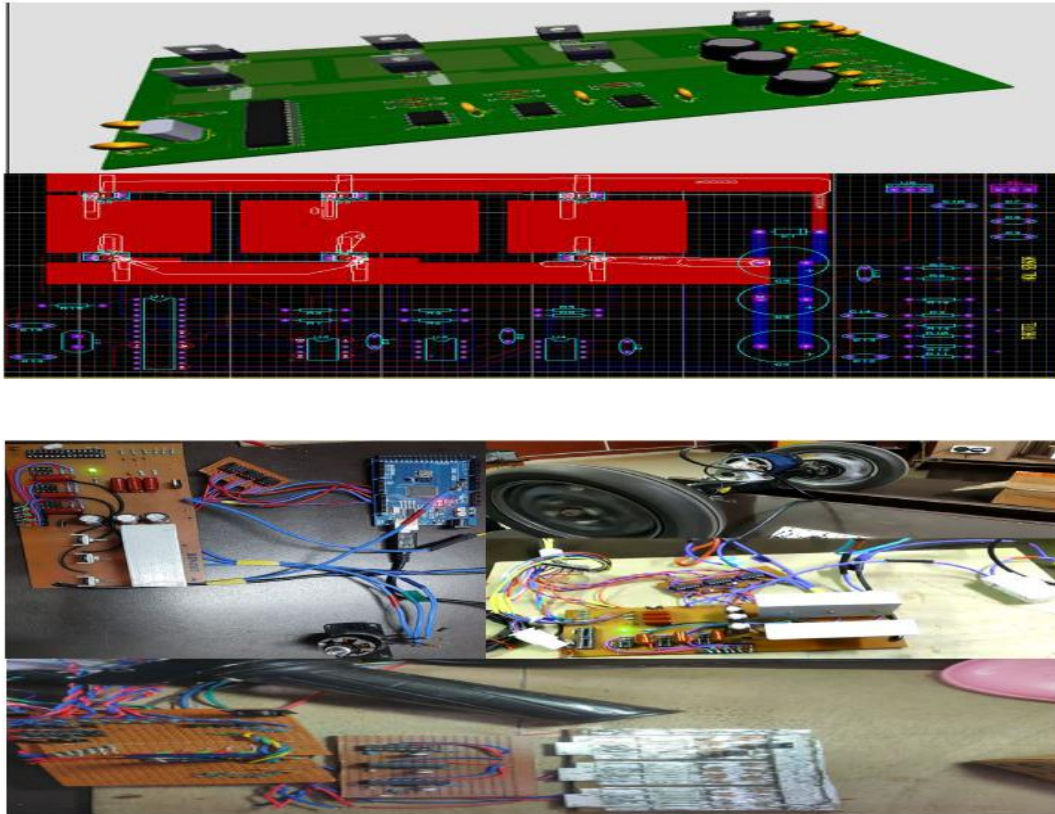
PCB design for 48volt 50Amp, 1KW BLDC motor Driver
